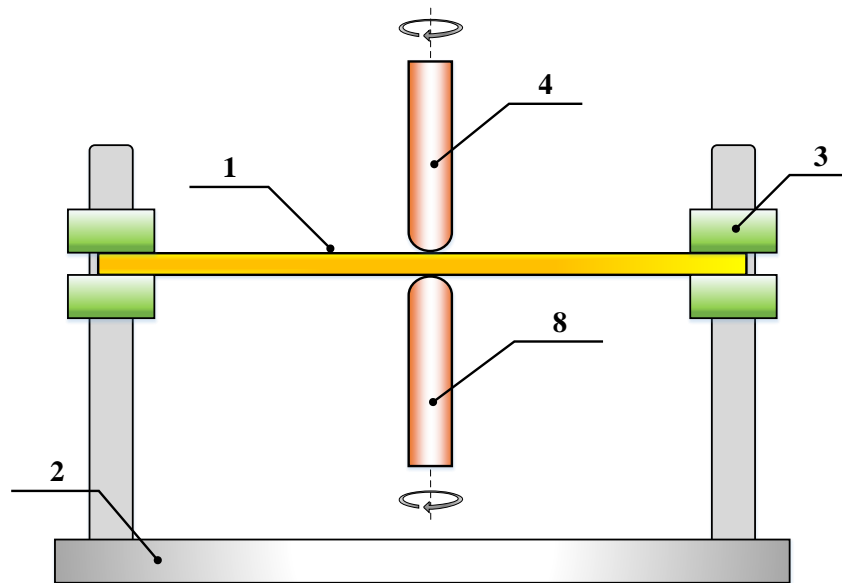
Two-point incremental forming process with counter tool support: 8-forming tool.
